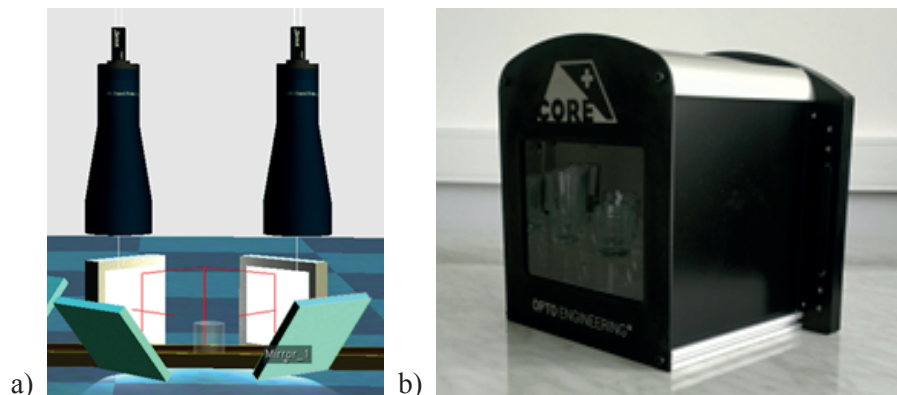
Inspection module for geometric flaws detection: a) concept of imaging system with classical telecentric lenses and mirrors, b) compact telecentric lens.
